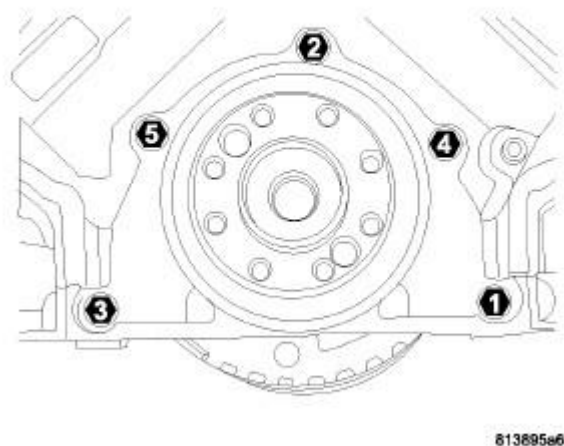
REAR SEAL RETAINER TORQUE SEQUENCE
